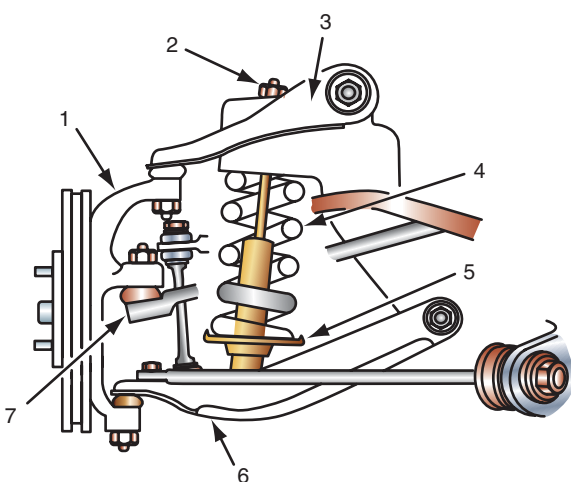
Short-and-long arm front suspension with the coil spring between the upper control arm and the chassis.
